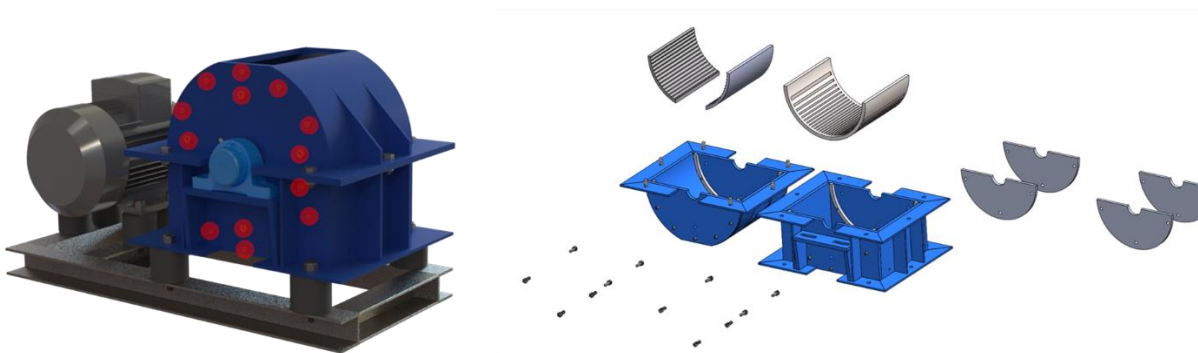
Hammer Mill Crusher Crushing Chamber Disassembling, highlighted on the left Figure are the bolts needed to be unbolted before components of the crushing chamber can be removed. On the right image is the components of the crushing chamber after being removed.
